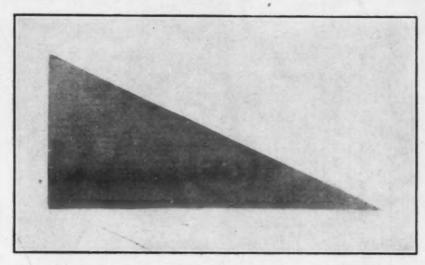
Longitudinal Section Through Center of Wedge, 1045 Steel, No. 4, Etched to Show Hardened Zone.
